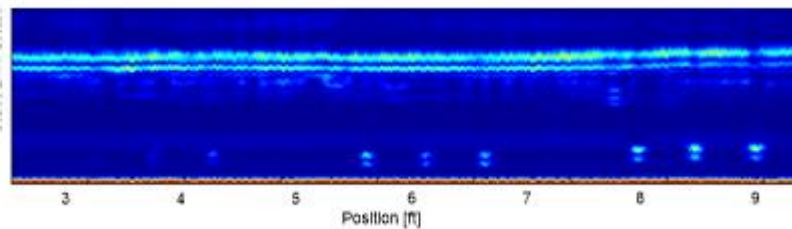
Crack defect pipe scan with EMAT- base material cracks
